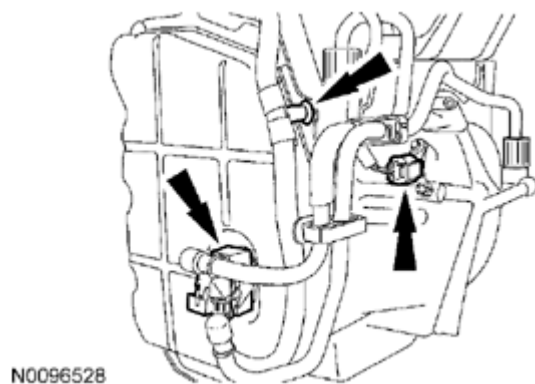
Locating Transmission Electrical Connectors, Wiring Retainer And Stud Bolt
